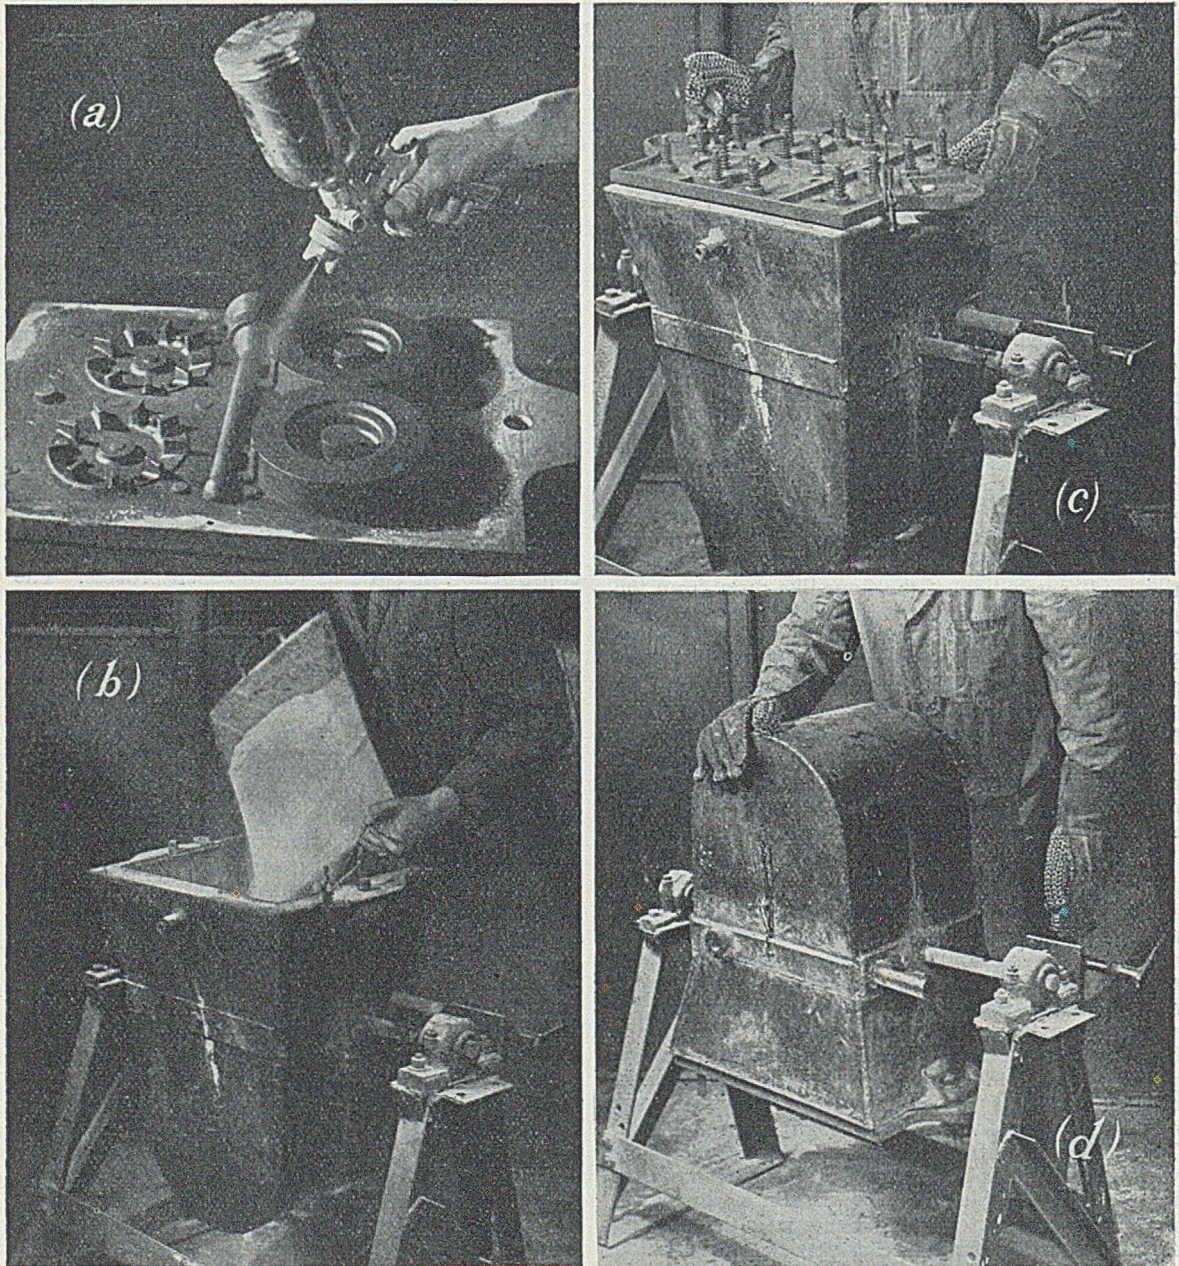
Initial Stages in the Production of a Shell Mould; (a) Spraying the Pattern with a Parting Agent; (b) Pouring the Moulding Mixture into the Dump Bucket; (c) Patternplate fixed in Position on the Dump Bucket; and (d) Inversion of the Dump Bucket, with the Pattern Below.
